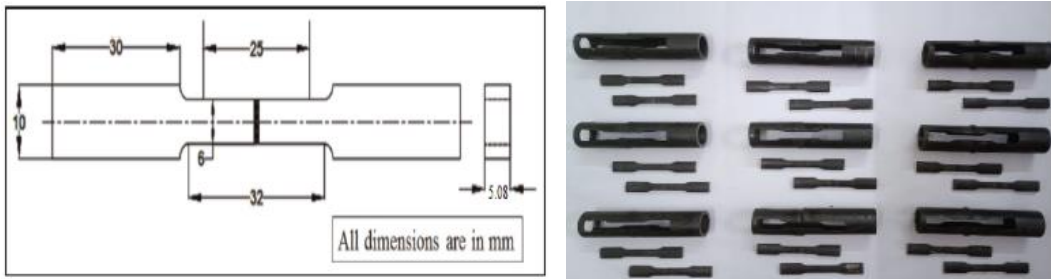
Tensile test samples obtained from the welded pipes
